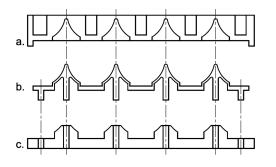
Moulding pop-out spikes: (a) female mould, (b) moulded part, (c) male mould
